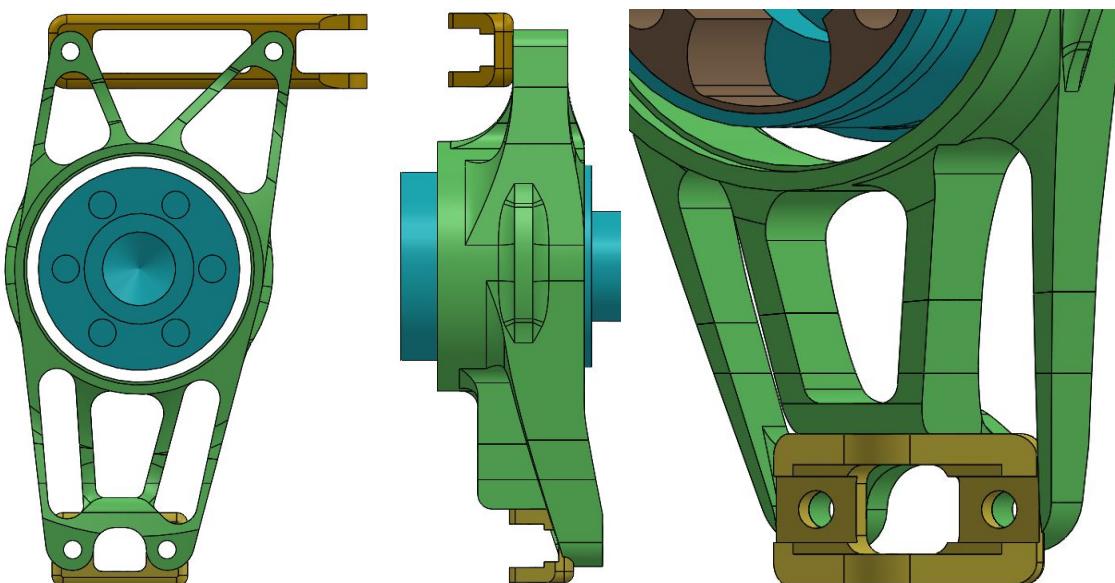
Upright revision 5D. Upright mass: 0.731 lb
